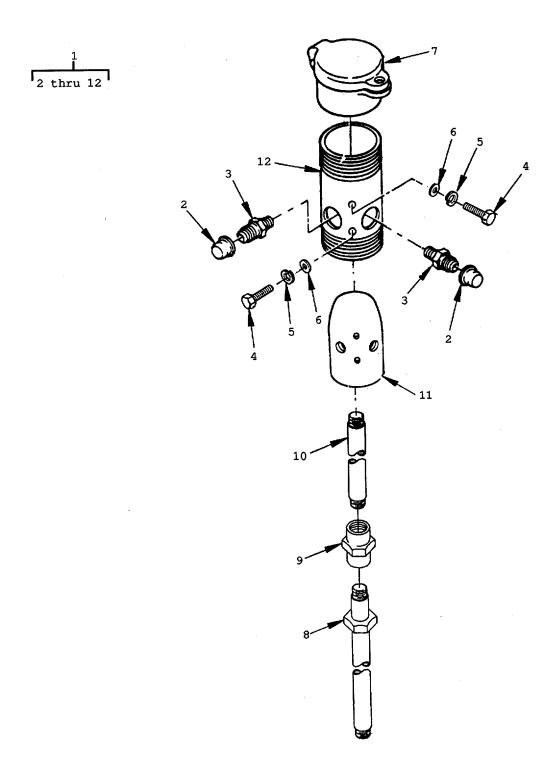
DRUM FILL ADAPTER ASSEMBLY, TYPE II
